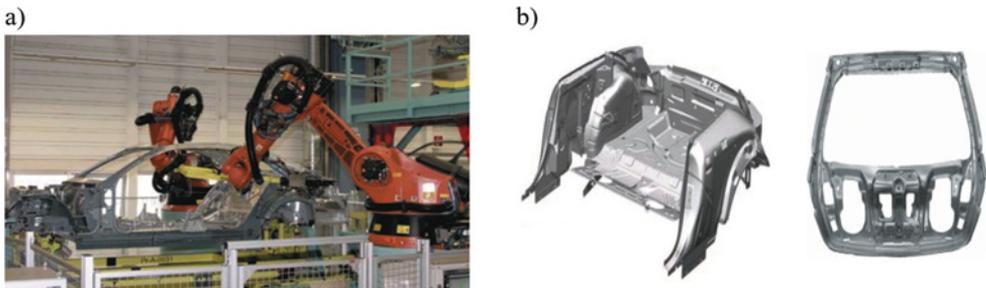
Example of the assembly of Audi TT Coupé body components: a) – assembly workstation; b) – body components assembled with the use of the CL technology
